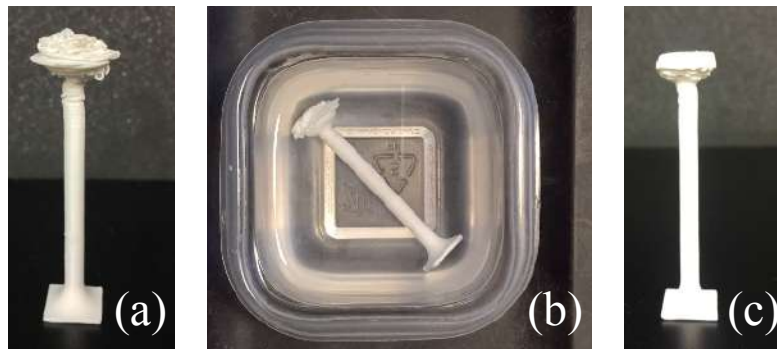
Images of Piston Rod Assembly Design #3 Pre and Post-Processing
